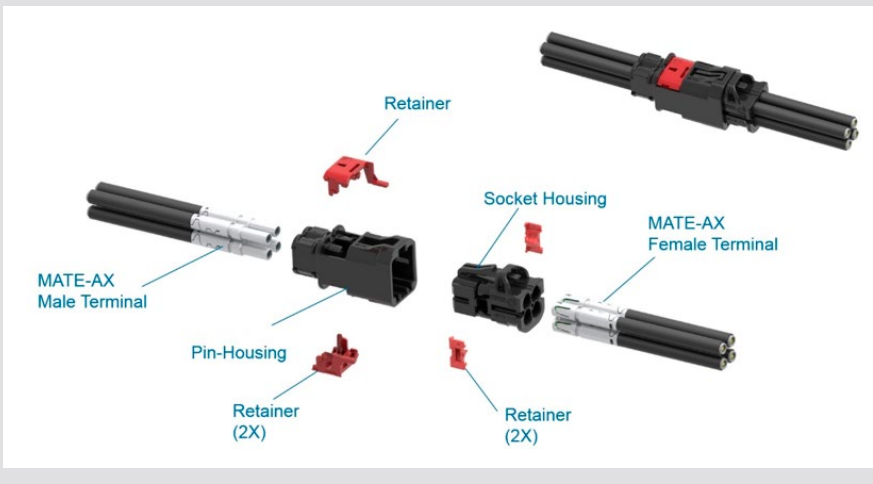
Exploded view of a 4-position unsealed MATE-AX connector and its sub components
